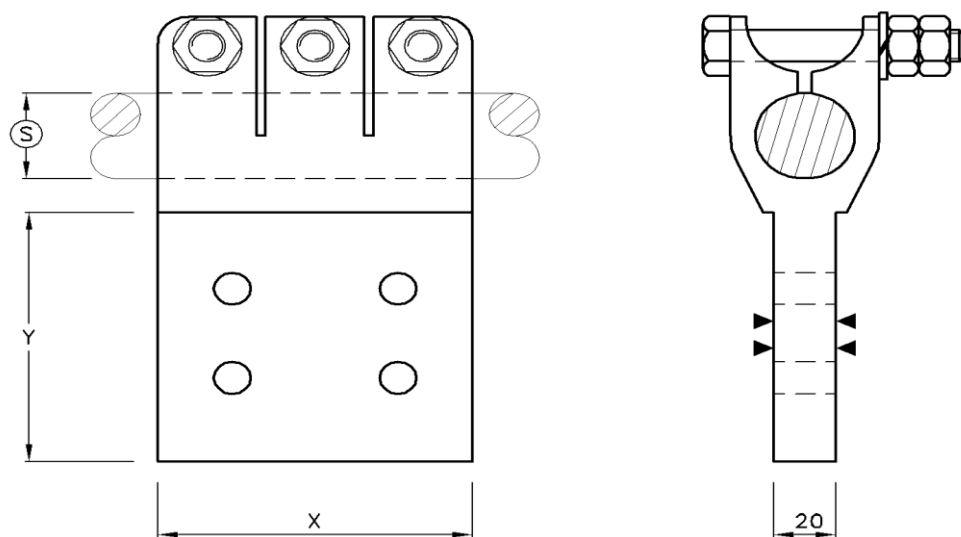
SPC – Type Palm Clamp to Stranded Conductor (Crimping)
